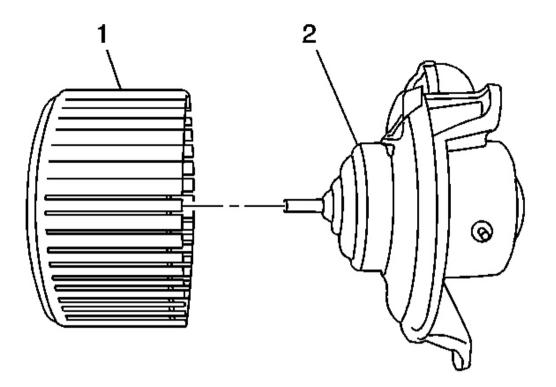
Blower Motor Impeller Retention Clip & Blower Motor Shaft Courtesy of GENERAL MOTORS CORP.
